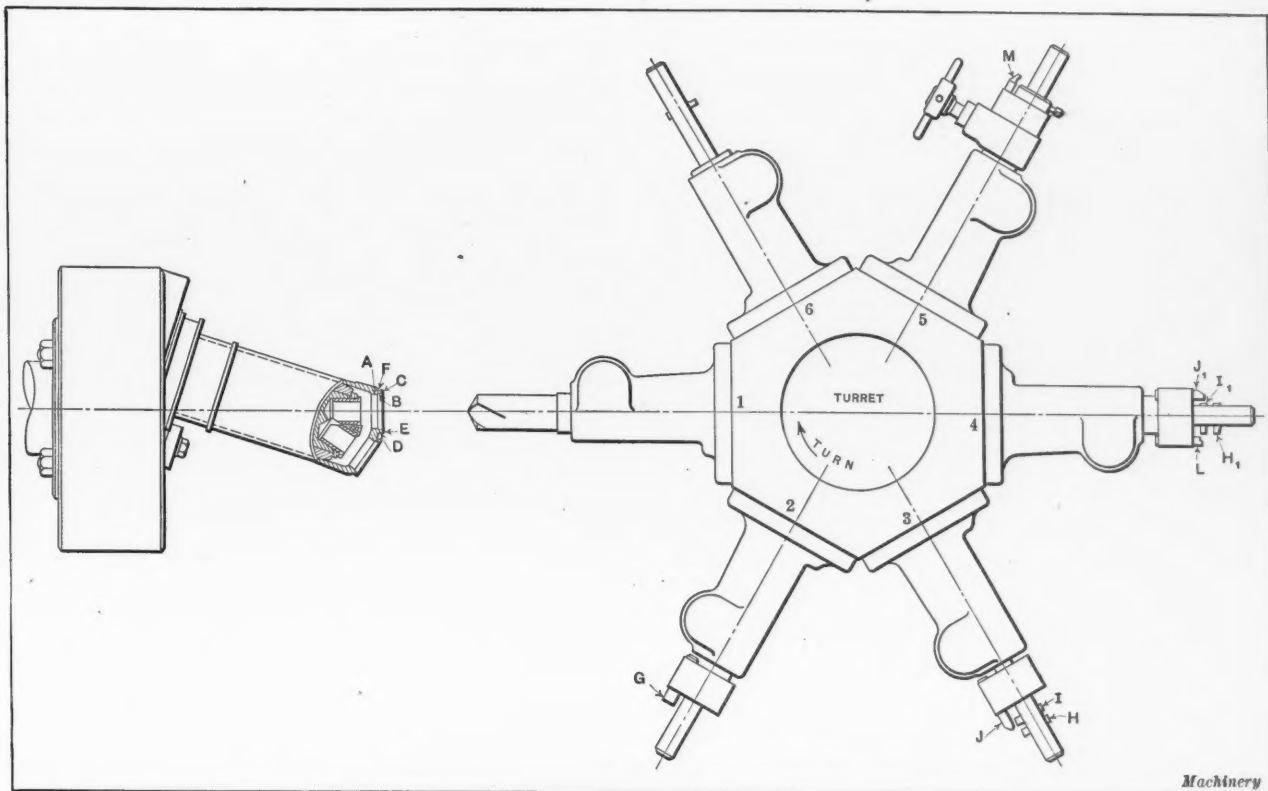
Lay-out of Tools provided on Turret Lathe for machining the Holes and Bosses on the Head of the Cylinder preparatory to welding the Valve Boxes in Place
